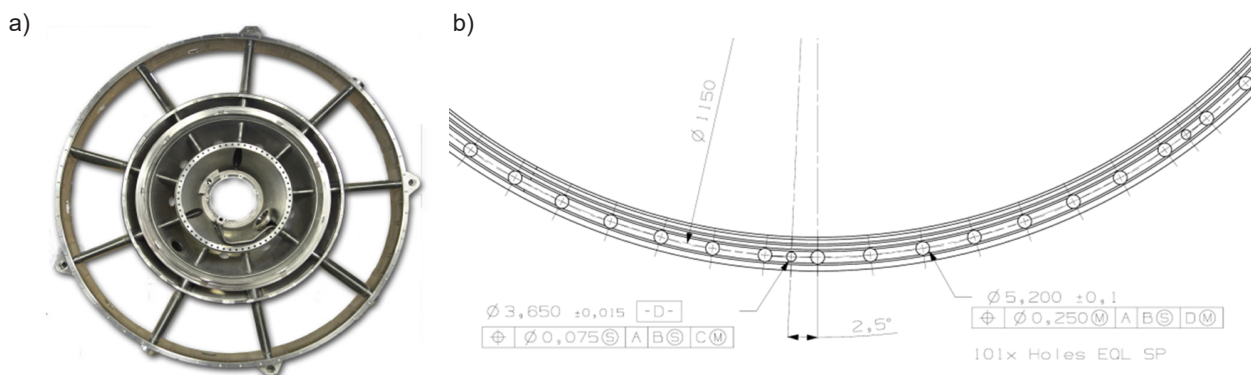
Parts of the fuselage type of an aircraft turbine engine:
